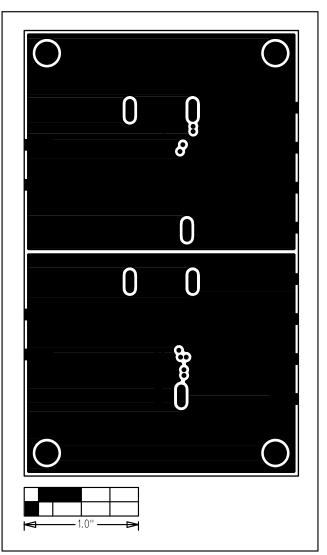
MAX9360 EV Kit PC Board Layout—Inner Layer 3 (VCC Layer)
